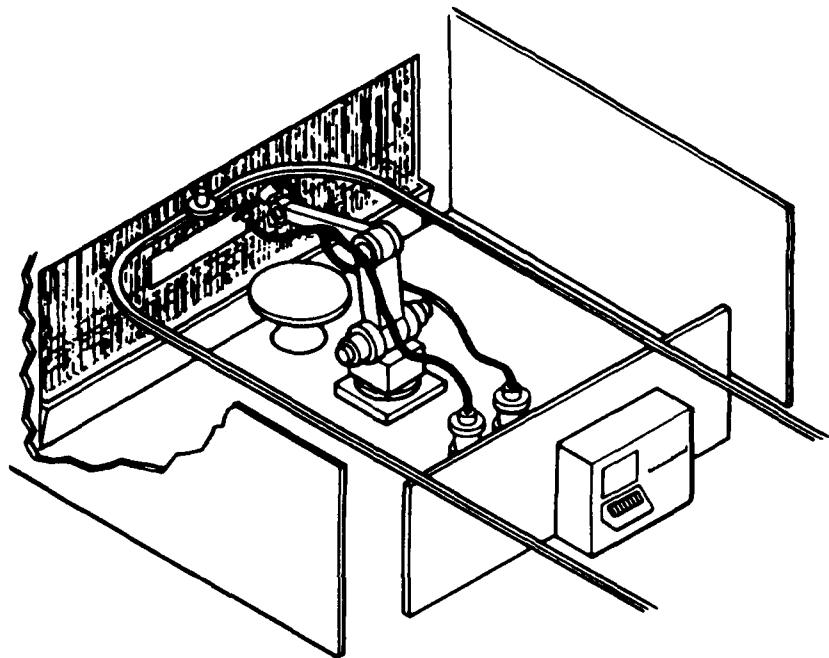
SMALL PARTS PAINTING. When a part is ready to be painted the operator mounts it on the conveyor system, tells the robot controller where the part is and what processes should be performed. The part waits on the conveyor until the parts ahead of it have been processed. Before a part is scheduled into the paint booth, the cell controller checks to see what process is to be performed on it and if the robot has the proper end effector currently mounted. If it does, the part is moved into the paint booth and the part is painted. If the robot does not have the right paint for the component, it tells the operator to mix up a small batch of paint for that item. Then when the item is moved into the booth, the operator mounts the new paint gun on the robot.
